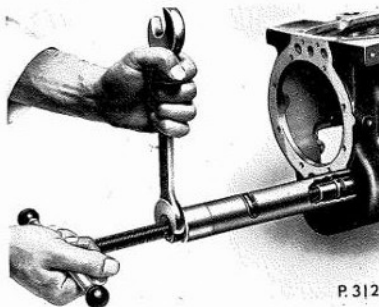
Withdrawing the reverse gear shaft using Churchill Tool R.G.101B and Adaptor R.G.101B-3
